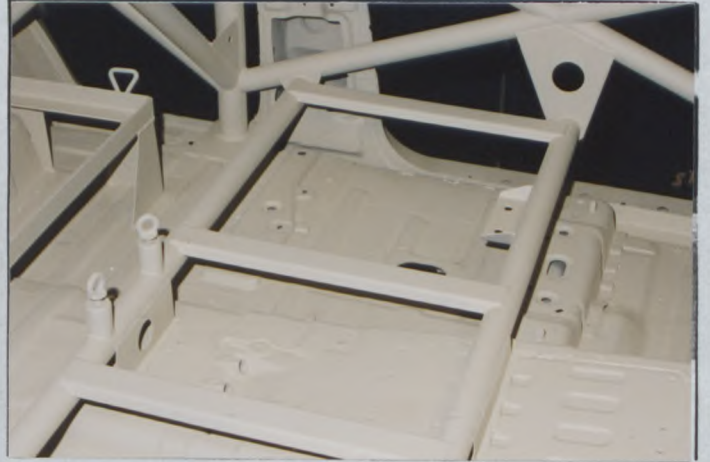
SEAT BRACKET AND LONGITUDINAL
